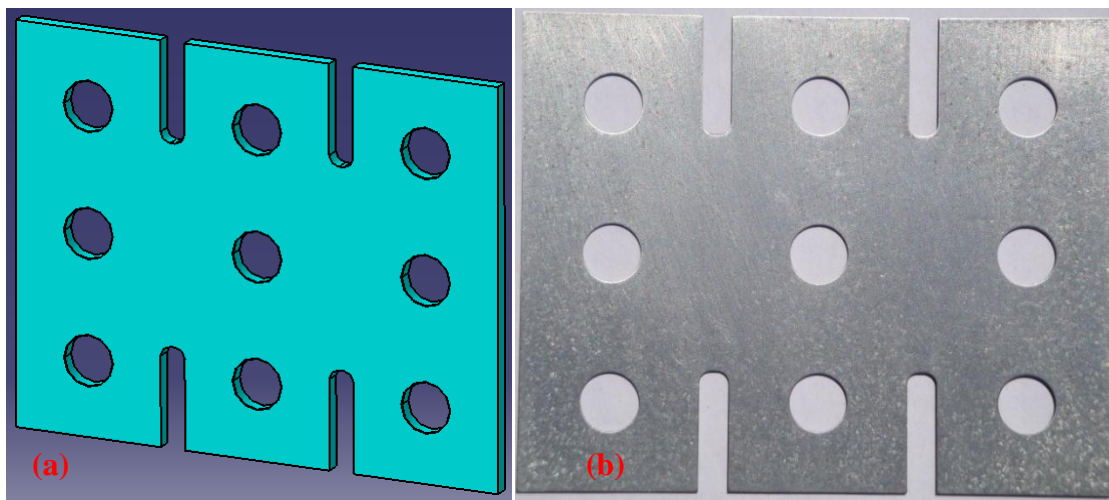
(a) CAD model and (b) photograph of the proposed sheet specimen used with the cyclic shear test fixture
